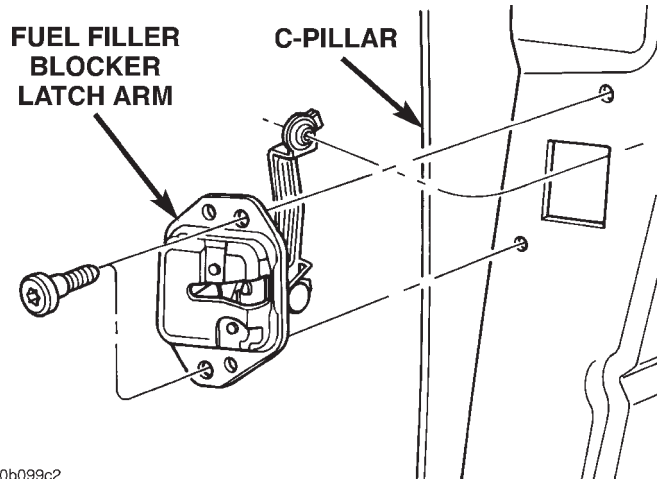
FUEL FILL DOOR BLOCKER LATCH
